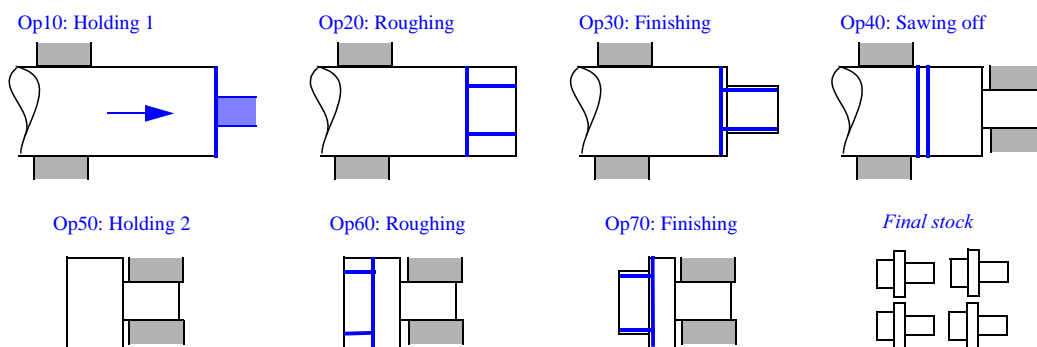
Manufacturing process: A unique manufacturing station which is an automatic lathe with a secondary spindle
